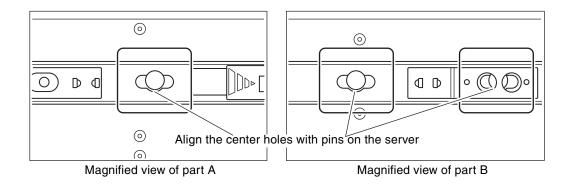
Magnified view of Part A and Part B (Locked)
